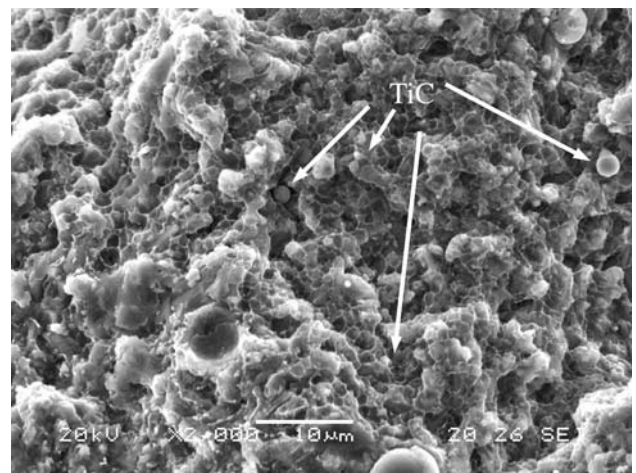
Fractograph of the laser welded joint with 0.3 mm thick Ti filler
